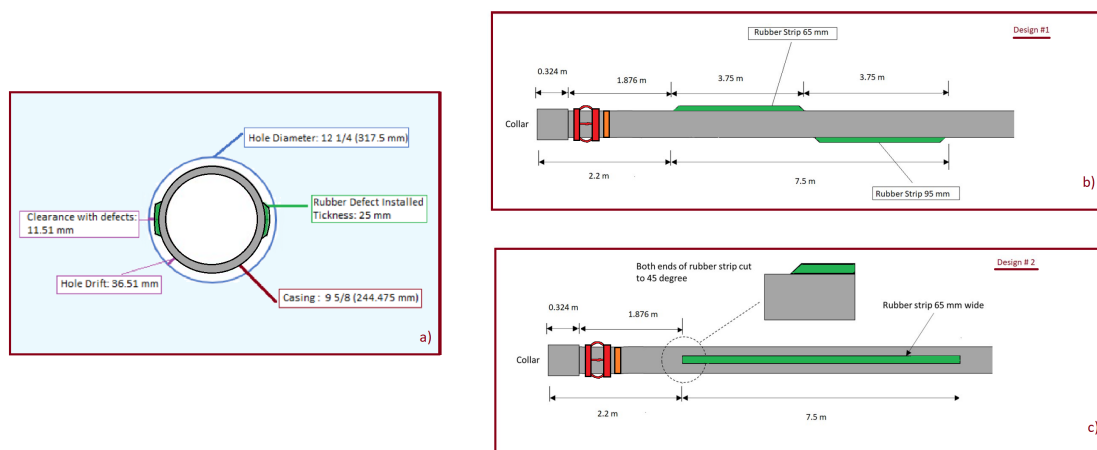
Schematics of casing joints: a) dimensions and clearance between the casing and borehole when defects are installed, b) casing joint with design 1, worst clearance scenario (when two strips are installed on the casing), c) Casing joint with design 2 with the typical design to be used (when a unique strip of rubber is installed).
